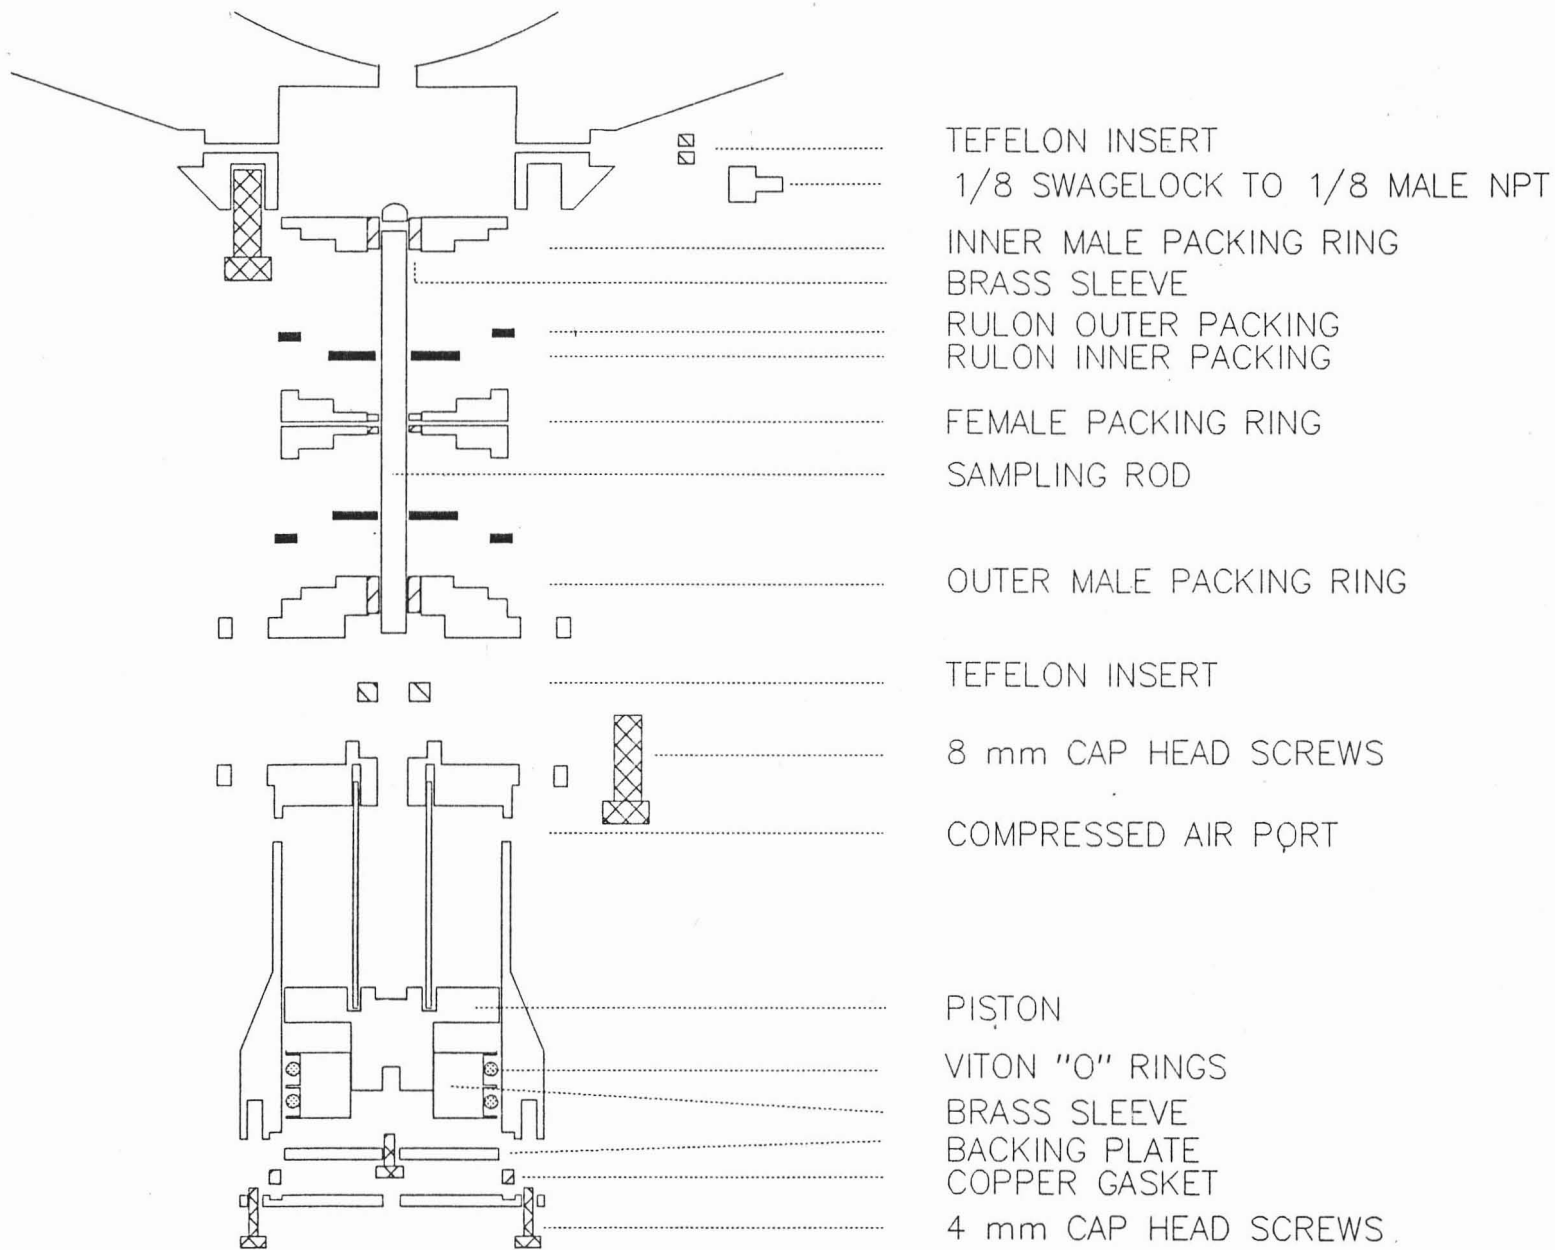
Liquid Sampling Device A - liquid sample hole, B - equilibrium cell wall, C - inner male packing ring, D - female packing ring, E - outer male packing ring, F - carrier gas channels, G - piston withdrawal compressed air parts, H - guide rods, I - Piston, J - brass sleeve, K - viton "O" rings, L - piston insertion compressed air parts
